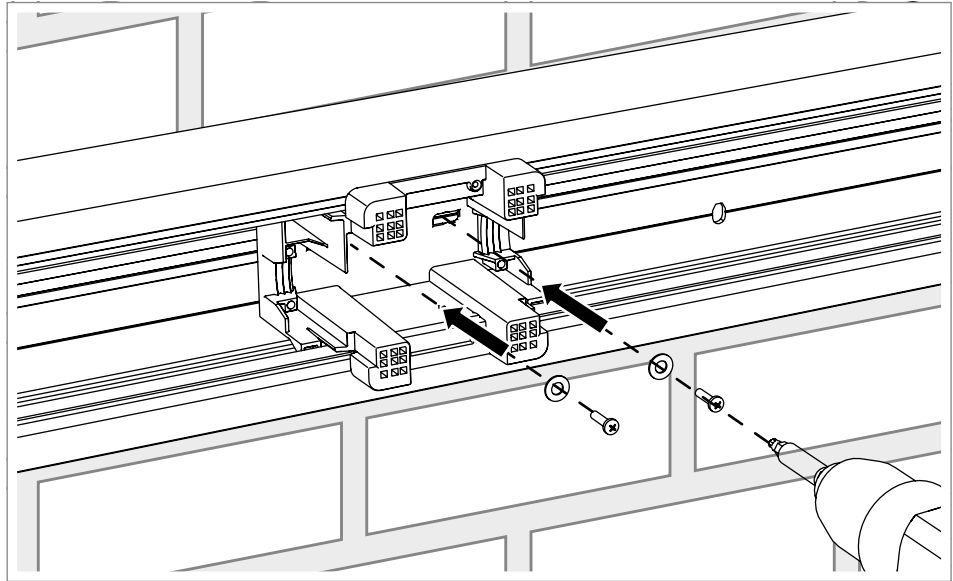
Screwing in the accessory mounting box 71GDCEE
